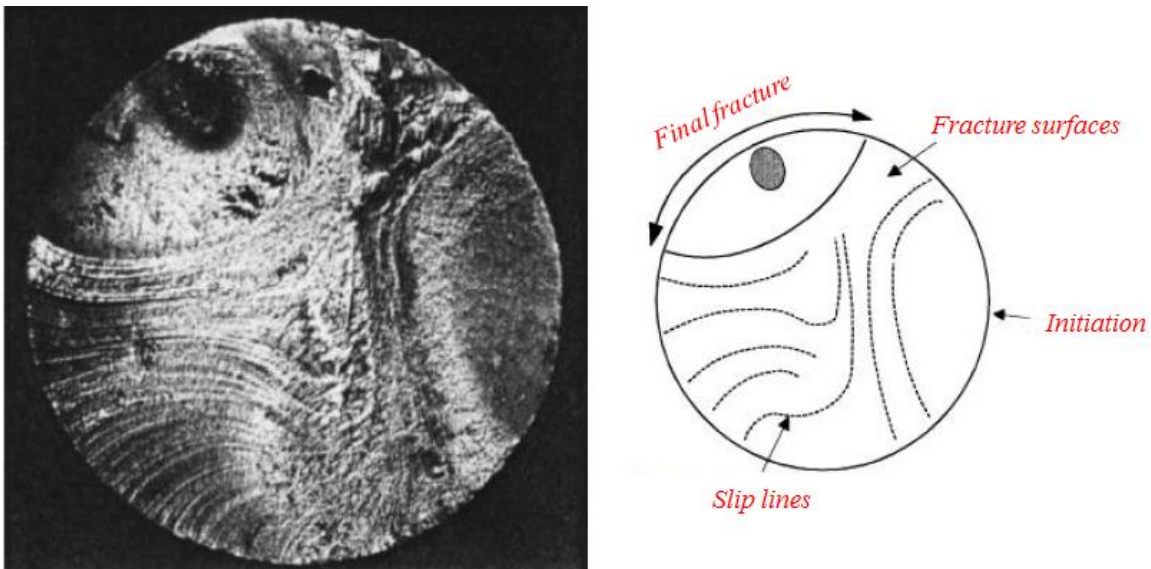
Fatigue fractography of automotive steel component (Schijve, 2009)
